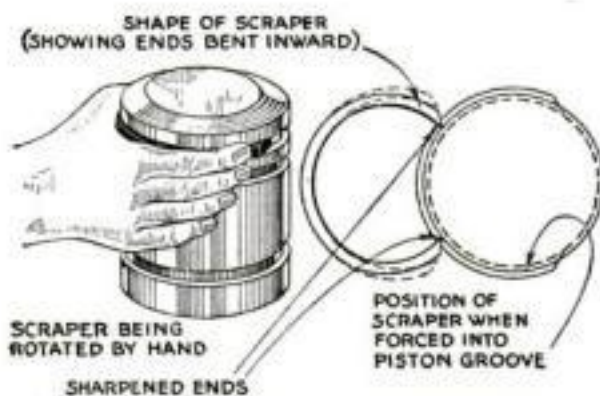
A carbon scraper fashioned from an old piston ring makes an ideal tool to remove the carbon from the ring grooves in the piston
